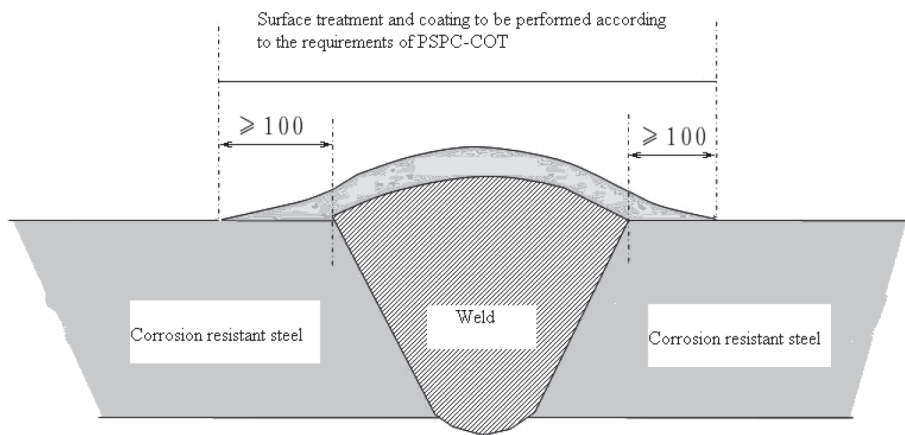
Welding between different corrosion resistant steels
